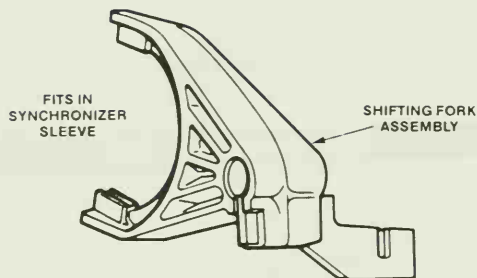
The shifting forks are positioned in the synchronizer sleeve. (American Motors Corporation)
